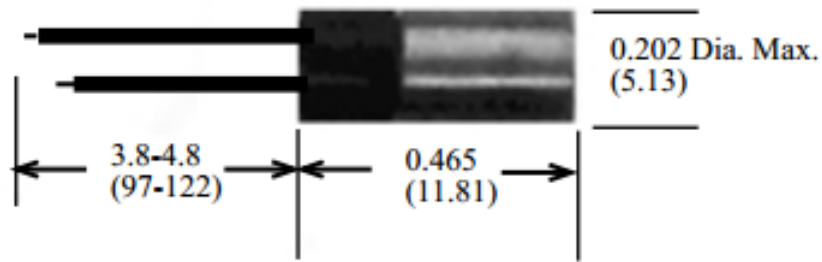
RP-2 detonator with dimensions in inches (mm)
